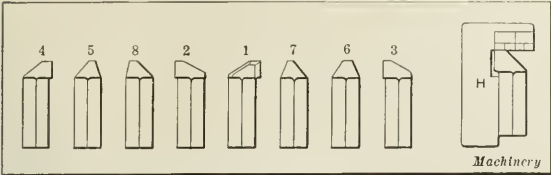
Tools and Gage used with Bar shown in Fig. 2
